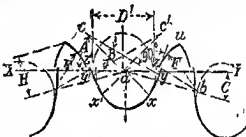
Laying Out a Standard Sprocket Tooth.
